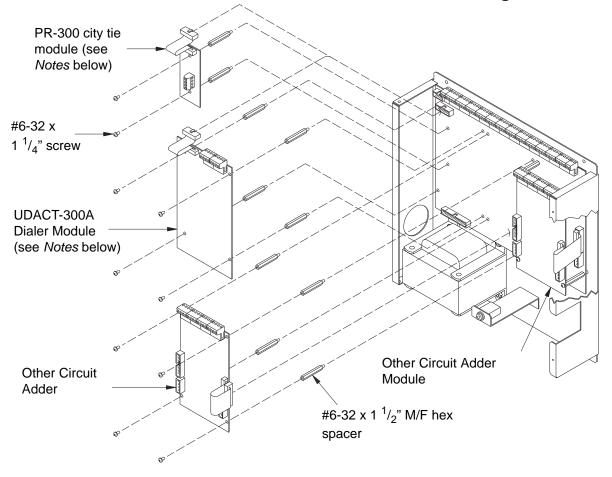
BB-1024 and BB-1072 Main Chassis Mounting Locations
